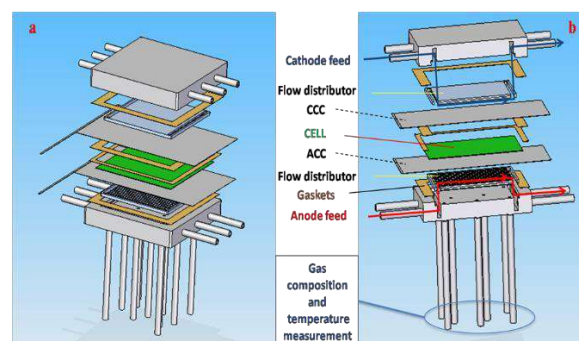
Exploded view (a) and cross section (b) drawings of the multisampling housing [1]
